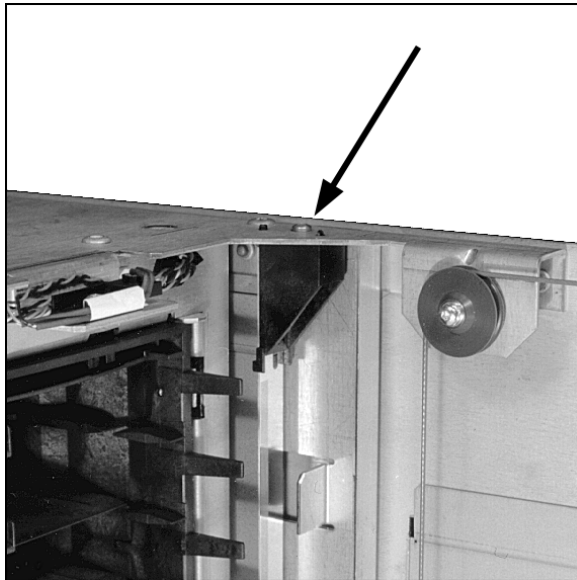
Vertical Encoder Strip Top Mount and Screw
